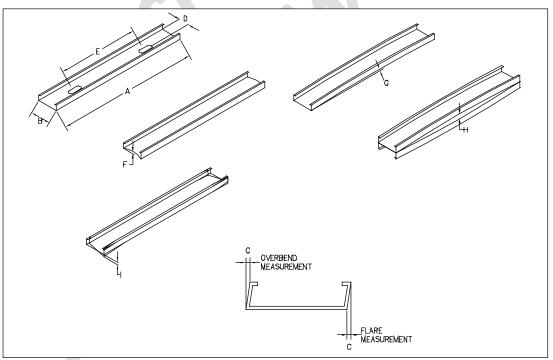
Manufacturing Tolerances for Structural Members
